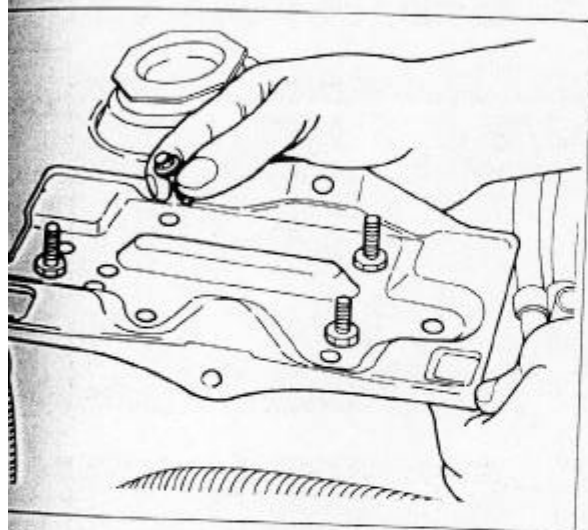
A — 91 REMOVAL OF BATTERY BRACKET
